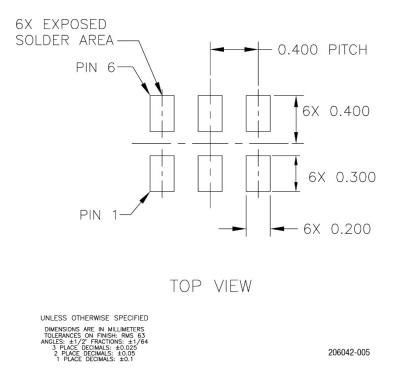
SKY59608-711LF PCB Layout Footprint (Top View)
